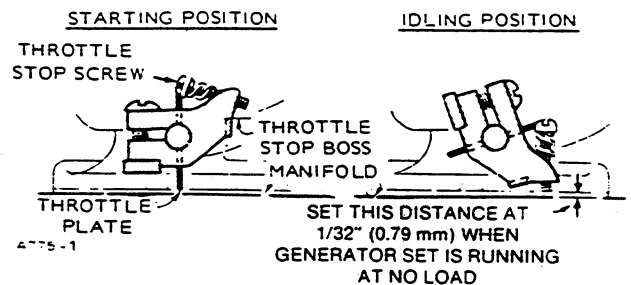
THROTTLE STOP SCREW ADJUSTMENTS
